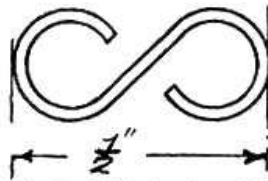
This hook, which joins the elastic to the rear hook, makes it easy to hitch up the rubber to a hand-winder.
